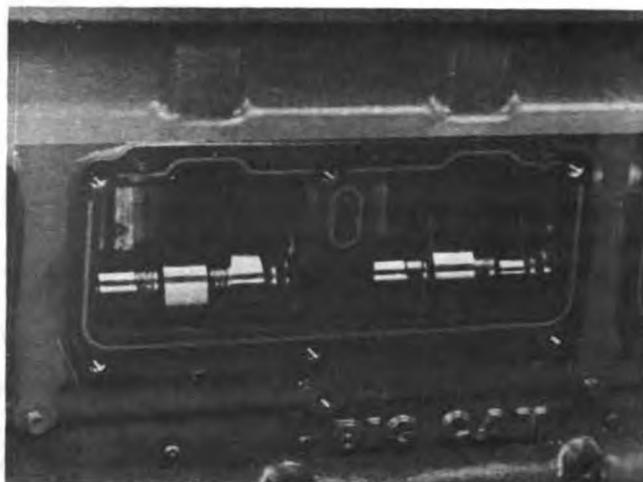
(N114259). Install The "Print-O-Seal" Cam Follower Gasket.
